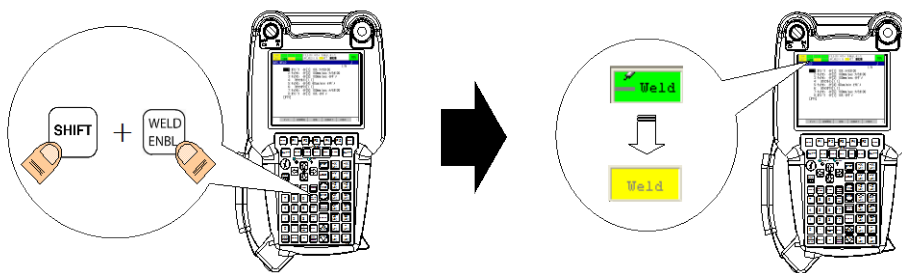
(f) Switch to Weld Disabled
